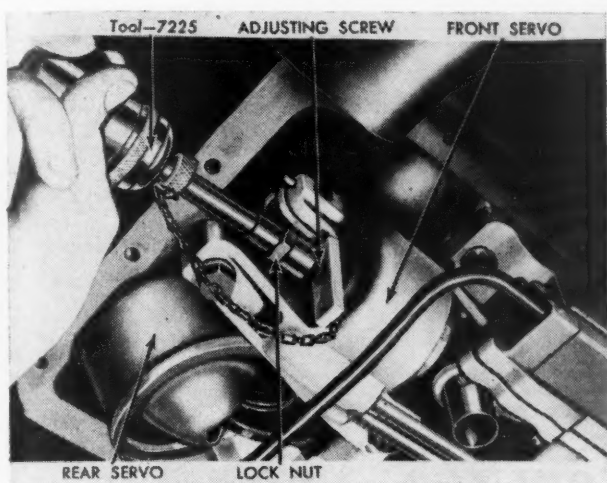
Special tool in position for adjusting the front band. Insert between piston stem and adjusting screw.
